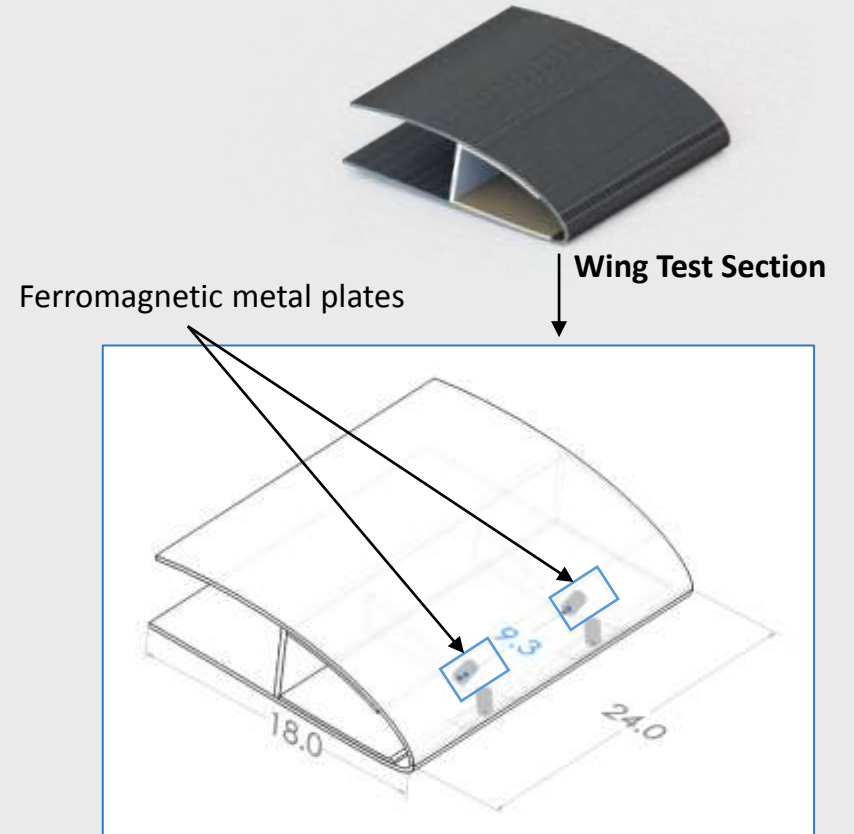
Interior view of ferromagnetic plates beneath leading edge
